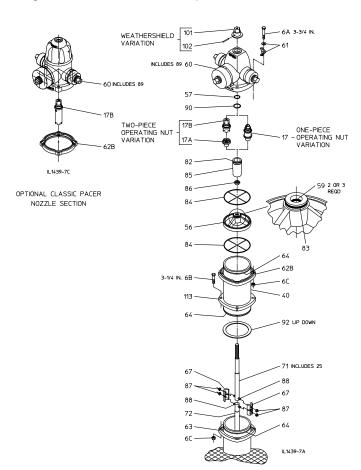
Upper Standpipe (Breakable Flange Orientation)
